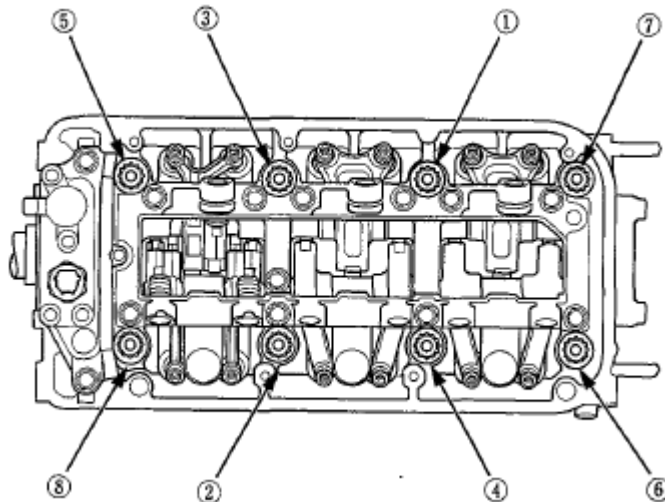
Identifying Front Cylinder Head Bolt Tightening Sequence
